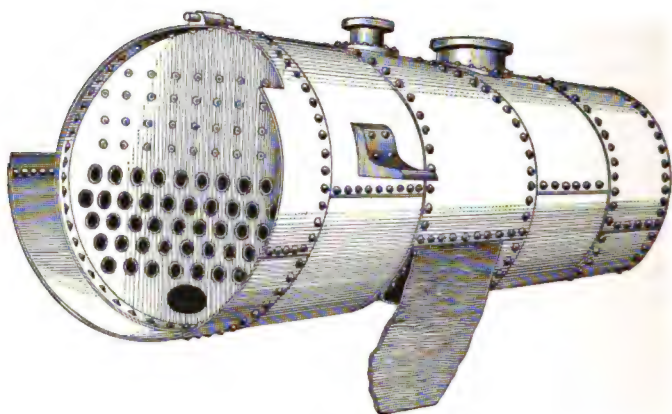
BOILER EXPLODED. CAUSE, LOW-WATER.
